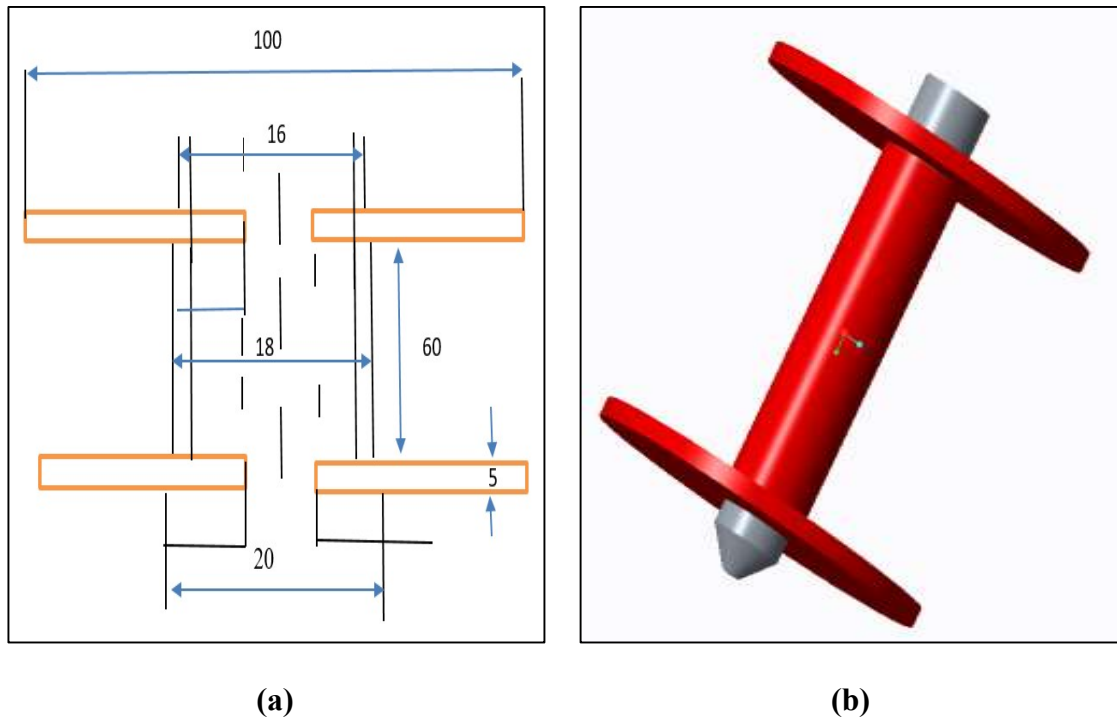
Design of finishing tool in (a) 2-Dimension (b) 3-Dimension
